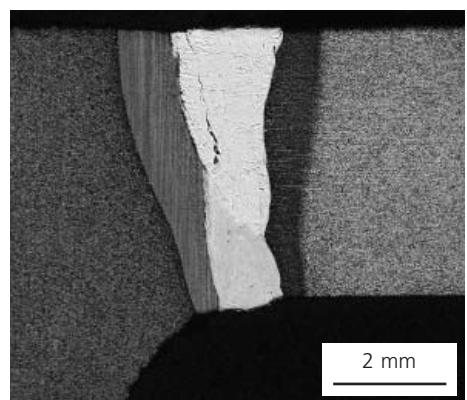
Polished cross section through a cracked weld seam of a disk-shaft test component after torsion-axial loading
